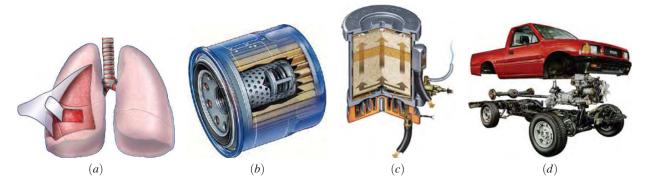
Different types of hand crafted expressive illustrations: cut-away view (a), ghosted view (b), section view (c), and exploded view (d). Technical illustrations are courtesy of Kevin Hulsey Illustration, Inc [Hul05].
